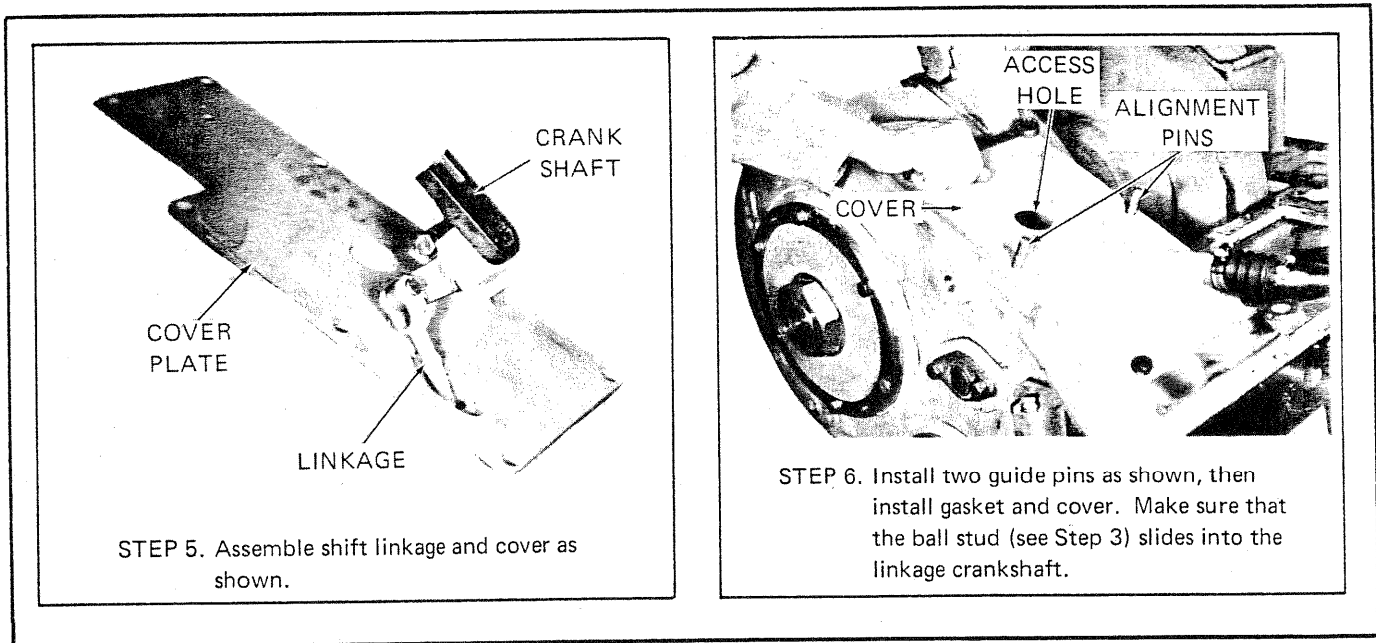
INSTALLATION OF INTERMEDIATE SHAFT ASSEMBLY FOR WINCH WITH FREE SPOOLING
